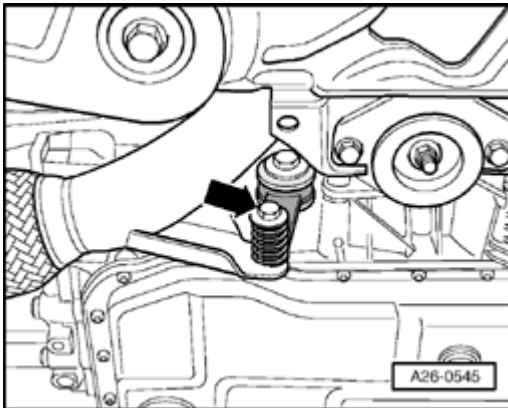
Removing Bolt At Strap For Right Front Exhaust Pipe
